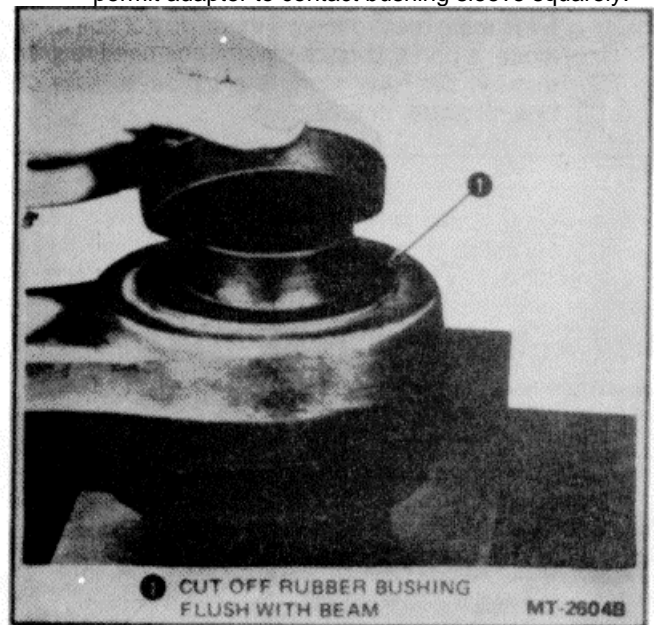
Preparing for Removal of Beam End Bushing Bushing
